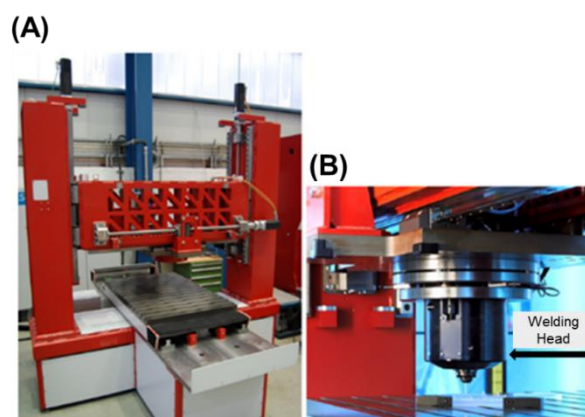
RNA Friction Riveting system used to produce friction-riveted joints: (a) triaxial gantry system (b) welding head (Reproduced from [70]).
